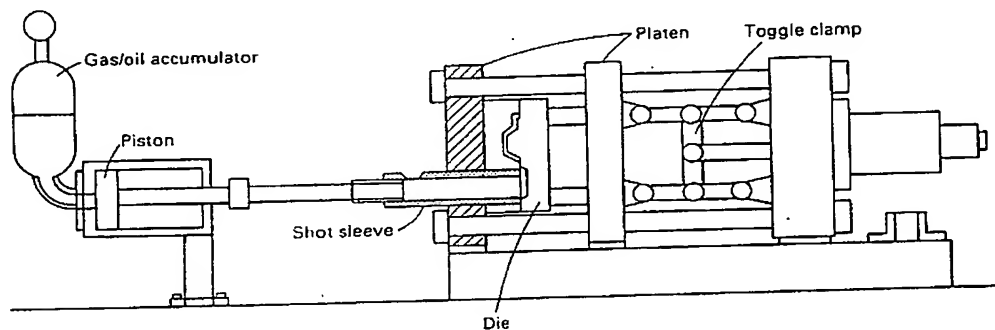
Schematic showing the principal components of a cold chamber die casting machine
